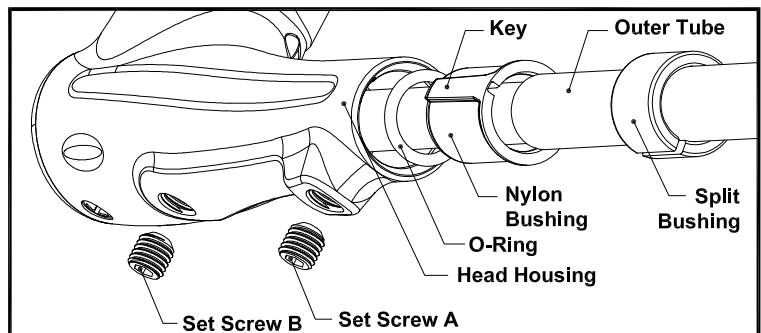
Exploded View of Head Housing Assembly. Align the Key on Nylon Bushing with the Key Way inside Head Housing when Seating Nylon Bushing back into Head Housing.
